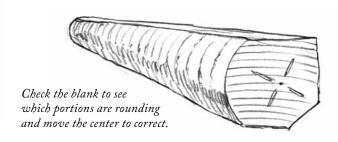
If you find you are cutting only one part of the billet, shift it in the lathe.
